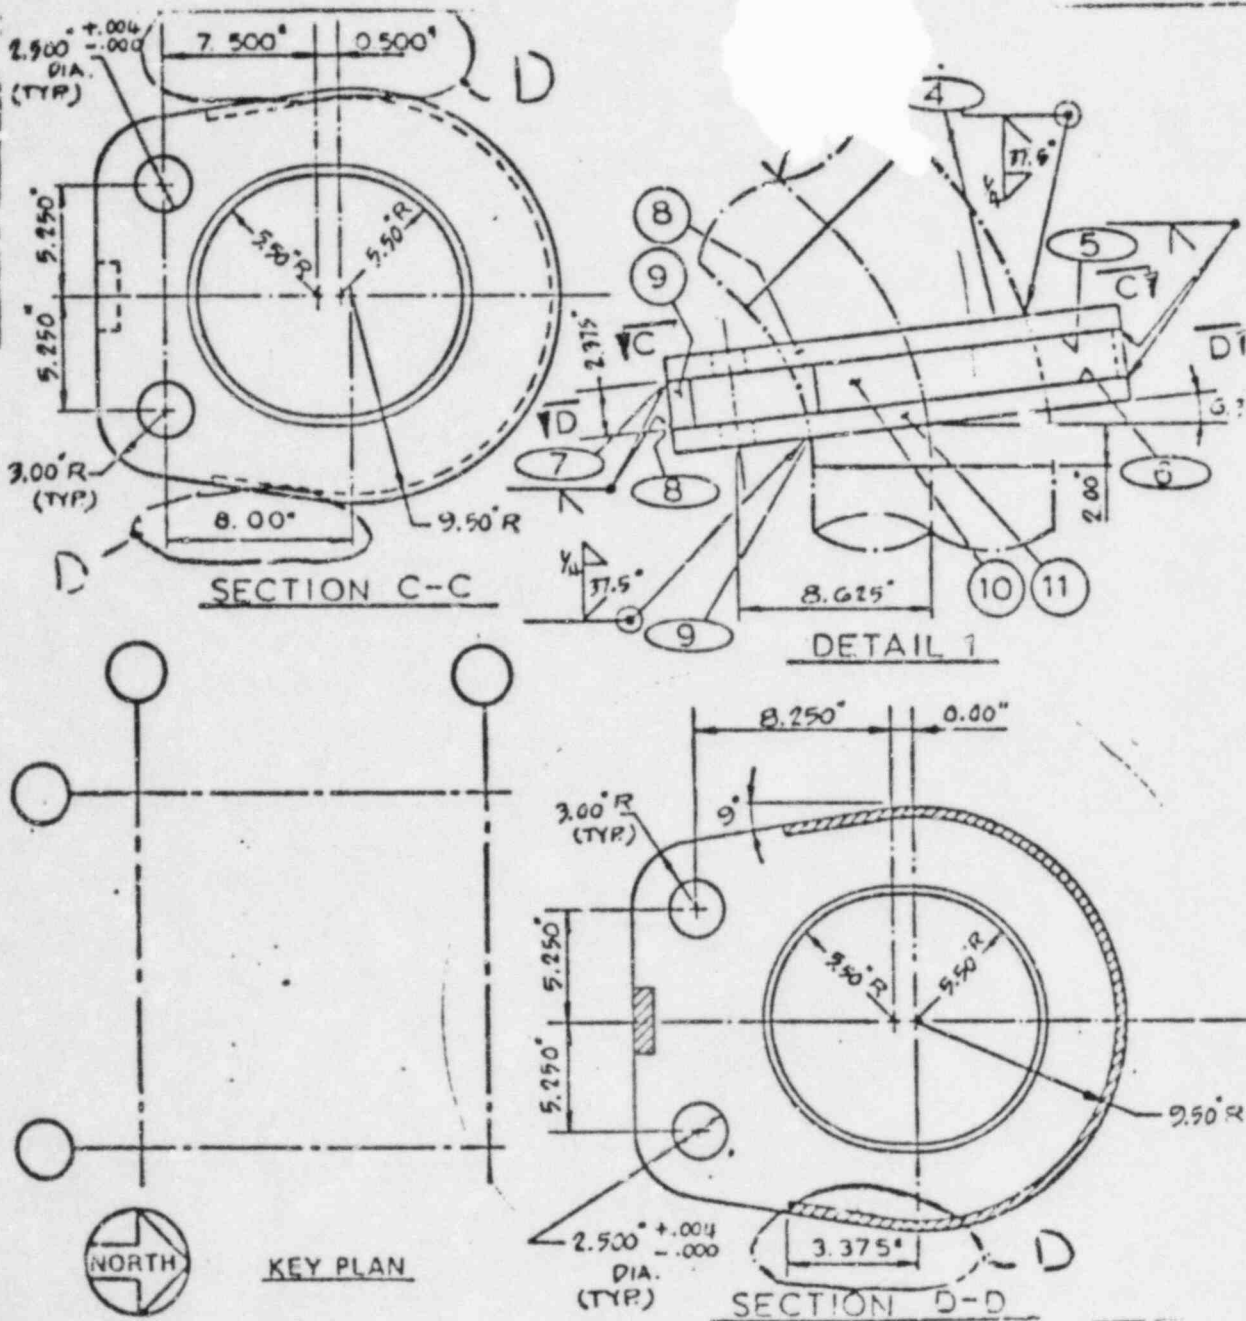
SRV Discharge Line Support - Welded Attachment Detail
